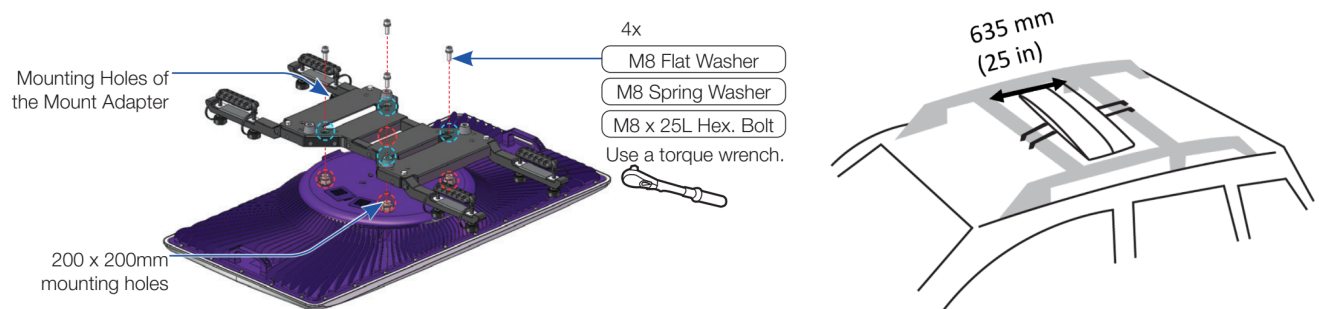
Antenna Assembled to Land Mobile Mount Adapter
